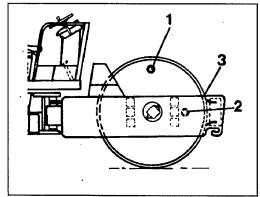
Filling with oil 1 Filler/drain plug 2 Sight glass 3 Dipstick
